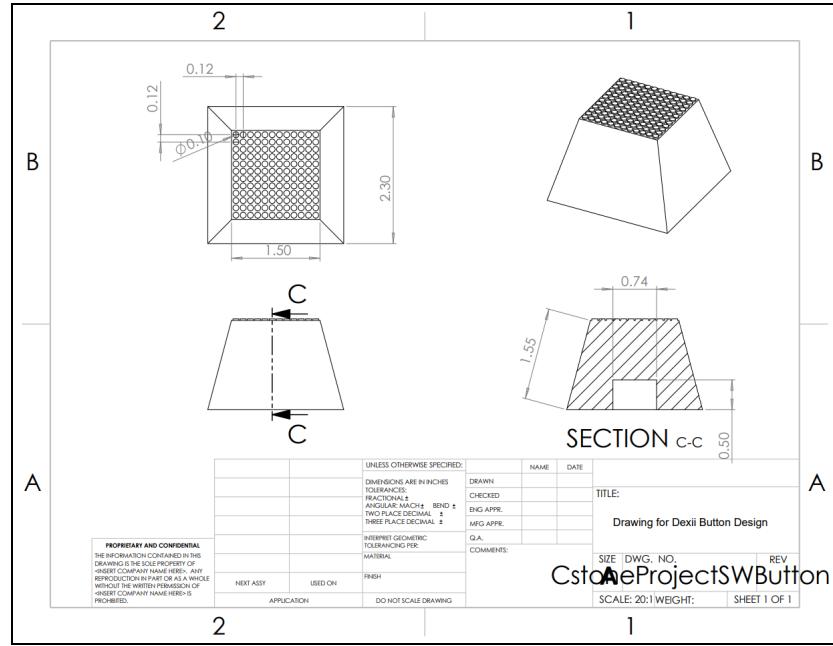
, SolidWorks drawing of button-keycap (Team 3, 2024)
